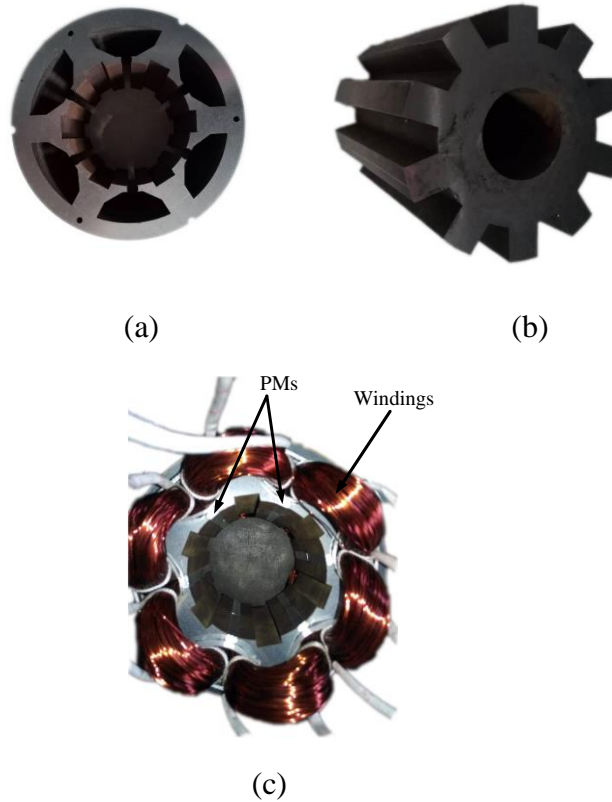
Prototype of (a) stator (b) rotor (c) winding configuration of the motor
